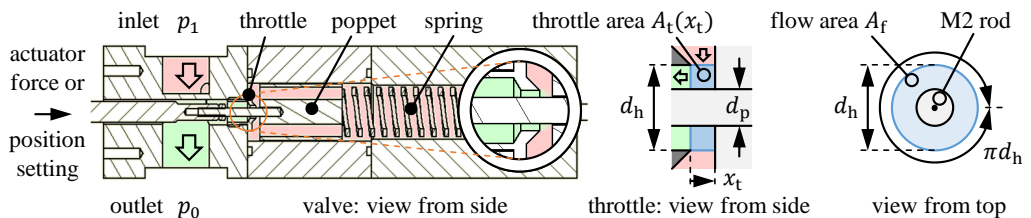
Design of poppet valve (left), principal design of its throttle (right)
